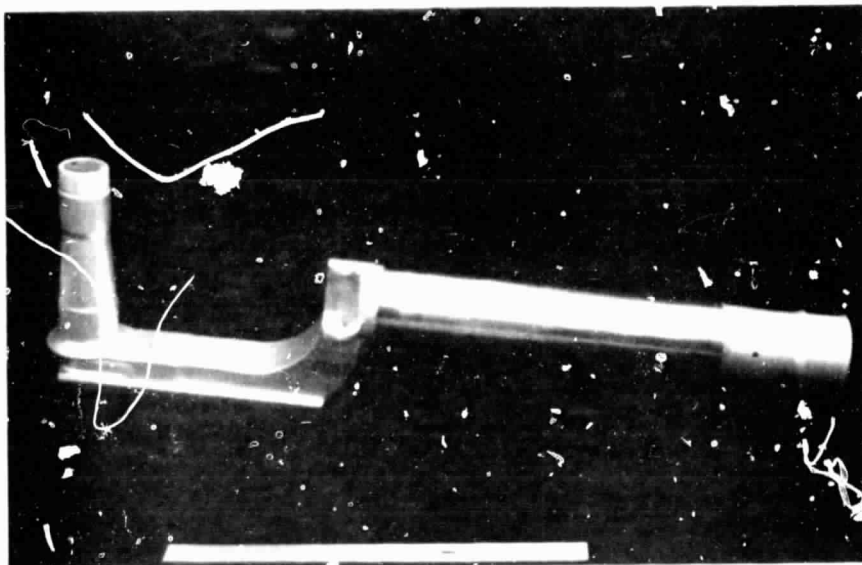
Piston/axle assembly for F-4 ion plated with aluminum.
